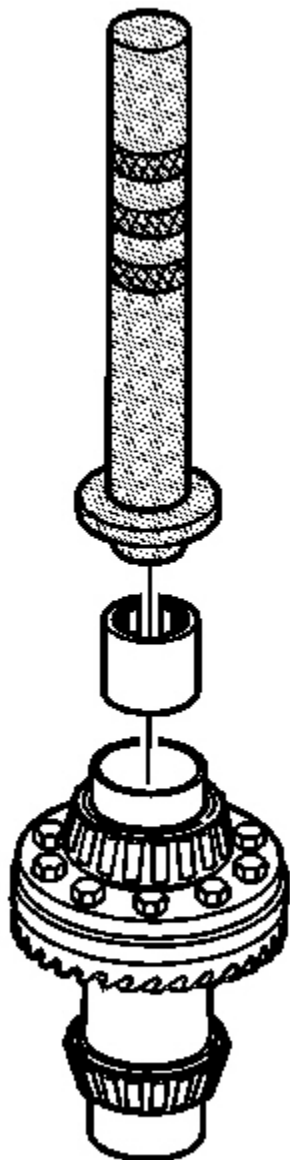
Installing Axle Shaft Bearing On The Carrier
